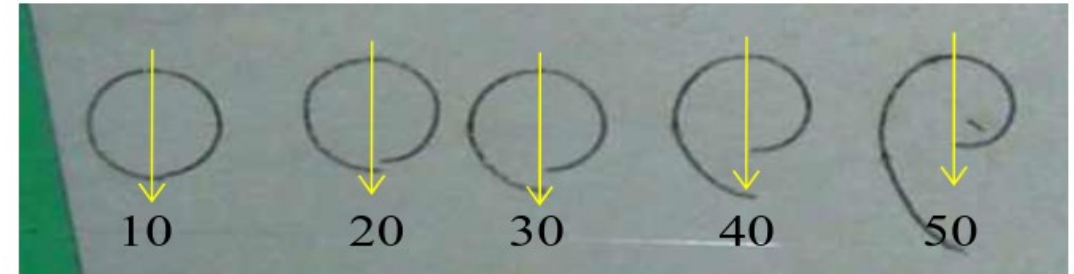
Patterns welded by the robot speed of from 10 mm/s to 50 mm/s at the weld speed of 60 mm/s
